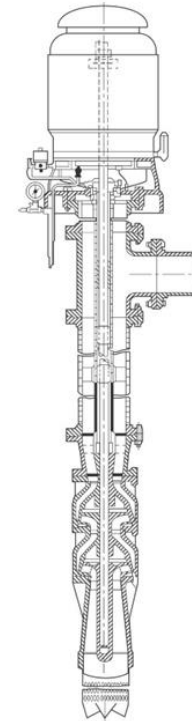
Water-Lubricated and Oil-Lubricated Shaft Pumps.
